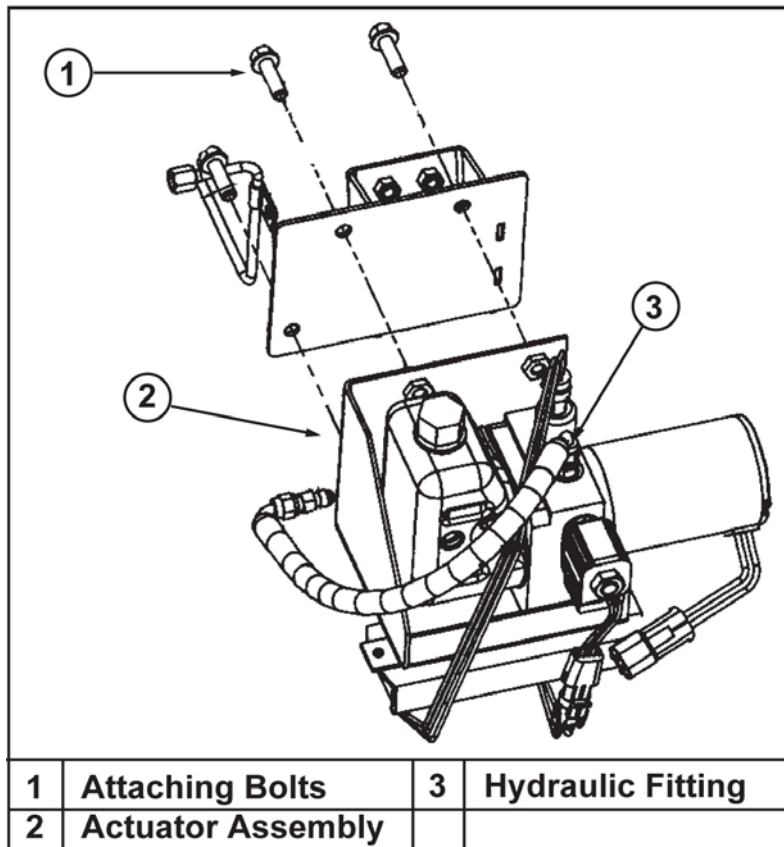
J72 Auto Apply Park Brake Actuator Assembly
